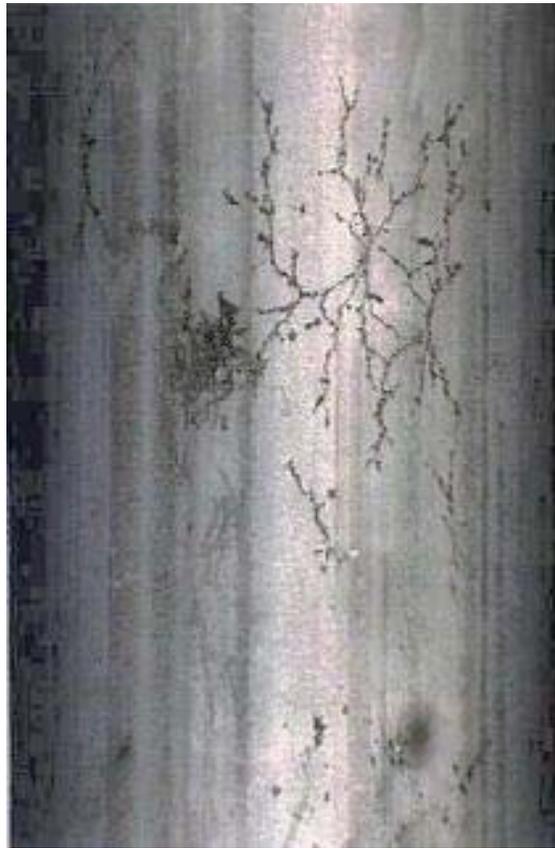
Close-up of the tube in Figure 4-78 showing tight cracks with a spider web appearance.
